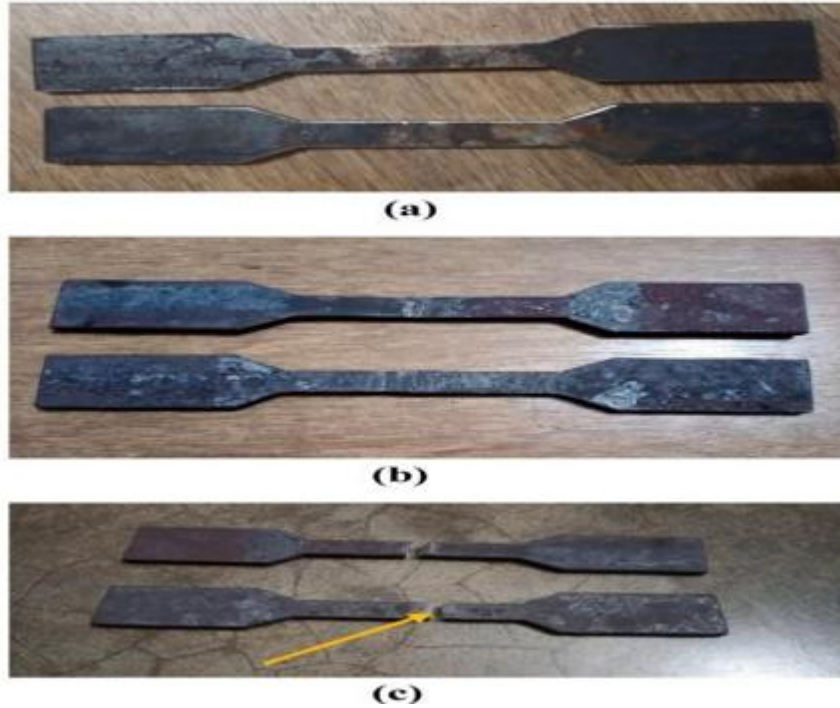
(a) as welded steel specimen (b) heat treated weld specimen (c) fractured specimen.
